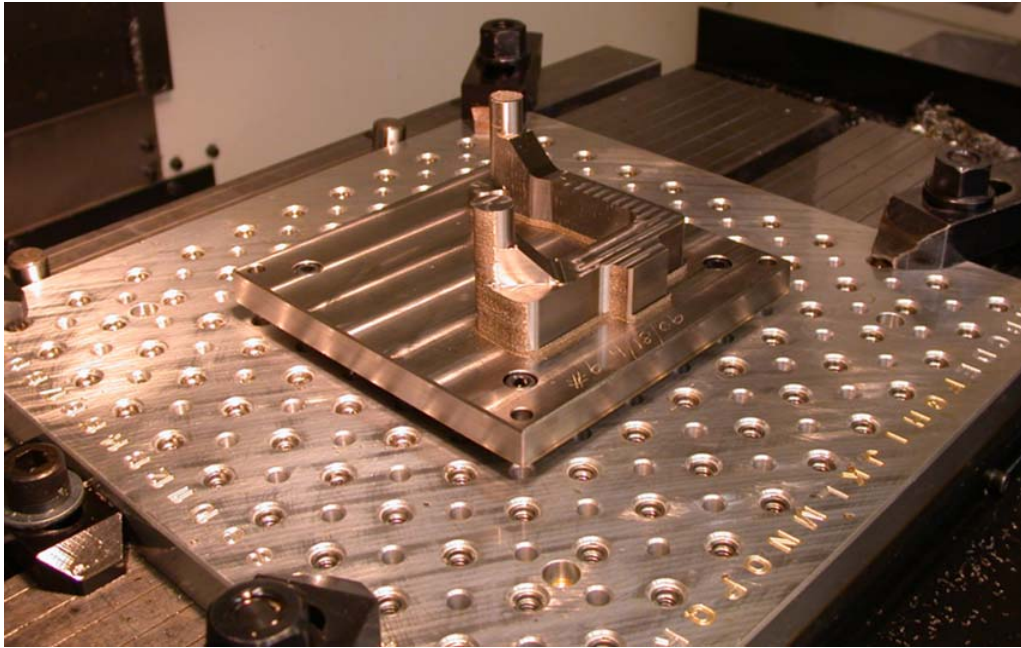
LENS Deposited Part During the Machining Process. The Fixture Plate and Machined Substrate Were Used in the LENS Machine As Well To Match Locating Positions. Note the Lack of Any Holes in the LENS Deposited Part.
